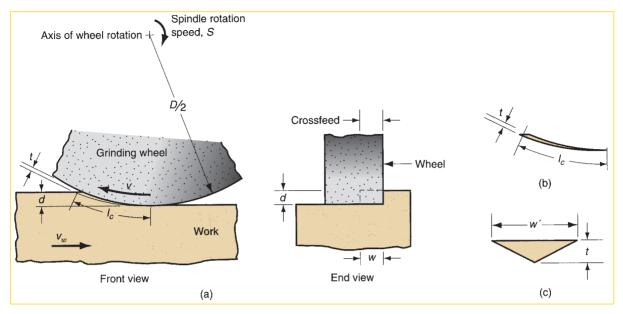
(a) The geometry of surface grinding, showing the cutting conditions; (b) assumed longitudinal shape and (c) cross section of a single chip.
